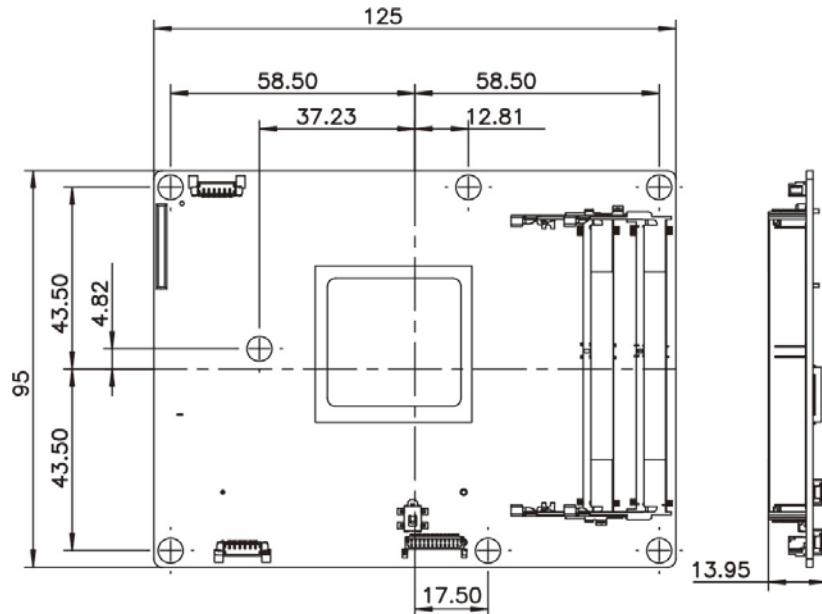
ICE-BDE-T7 Dimensions (without heatsink) (mm)
